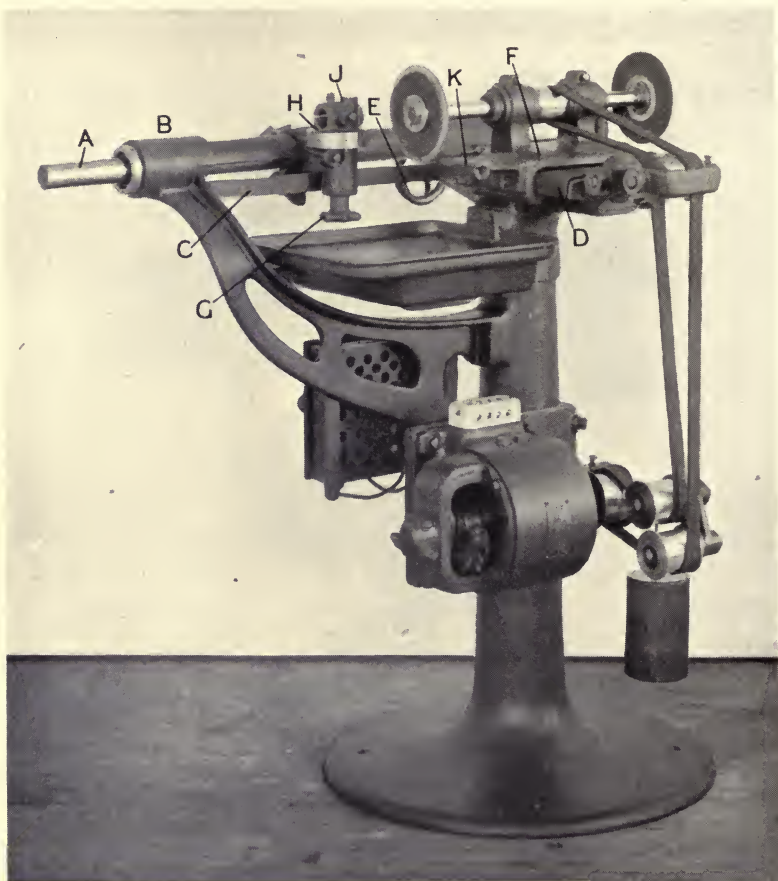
BROWN & SHARPE CUTTER GRINDER
